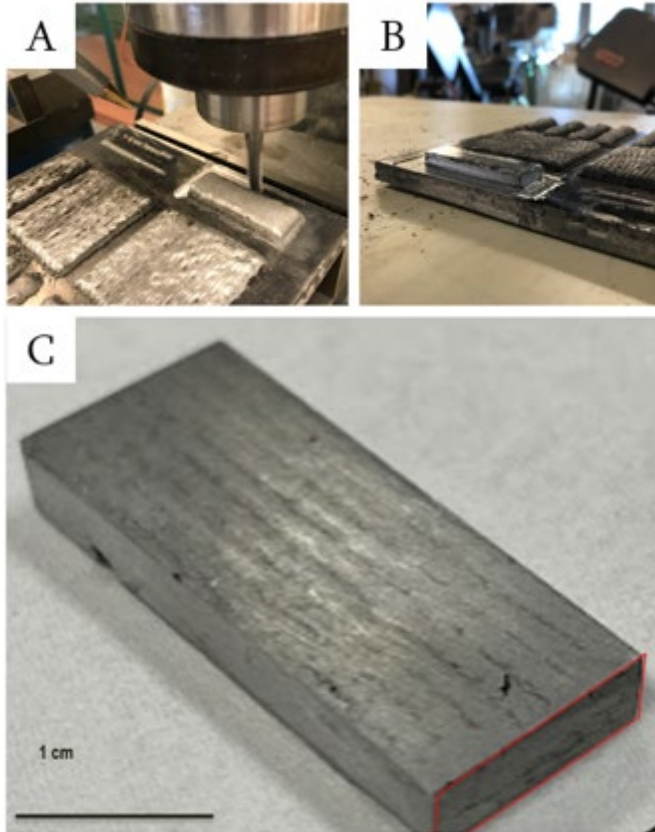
Rectangular coupon printing as a final step of the printing strategy, from the as-printed structure to the as-machined one.
